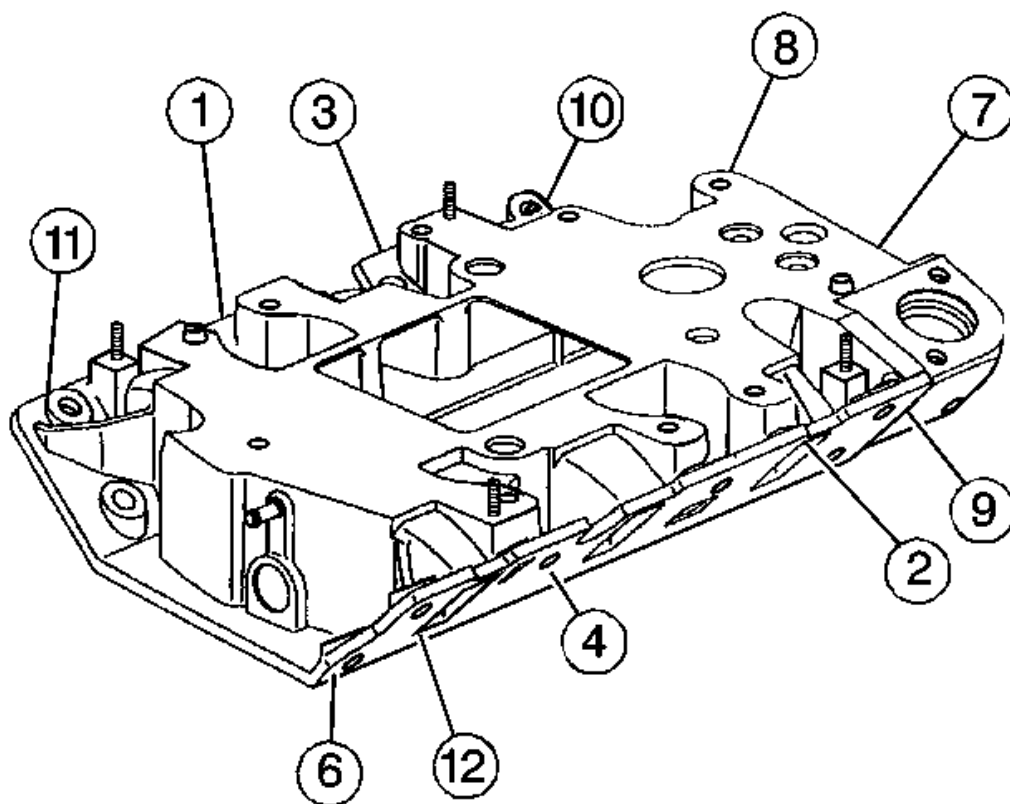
Lower Intake Manifold Bolts Tightening Sequence (L67)
